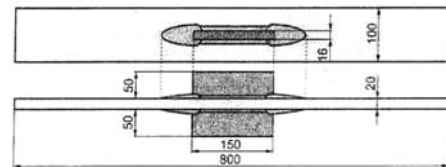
Shape and size of boxing fillet welded joint specimen
